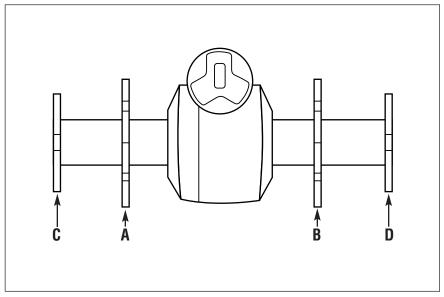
Order of installation on holders (welded steel holders shown).
